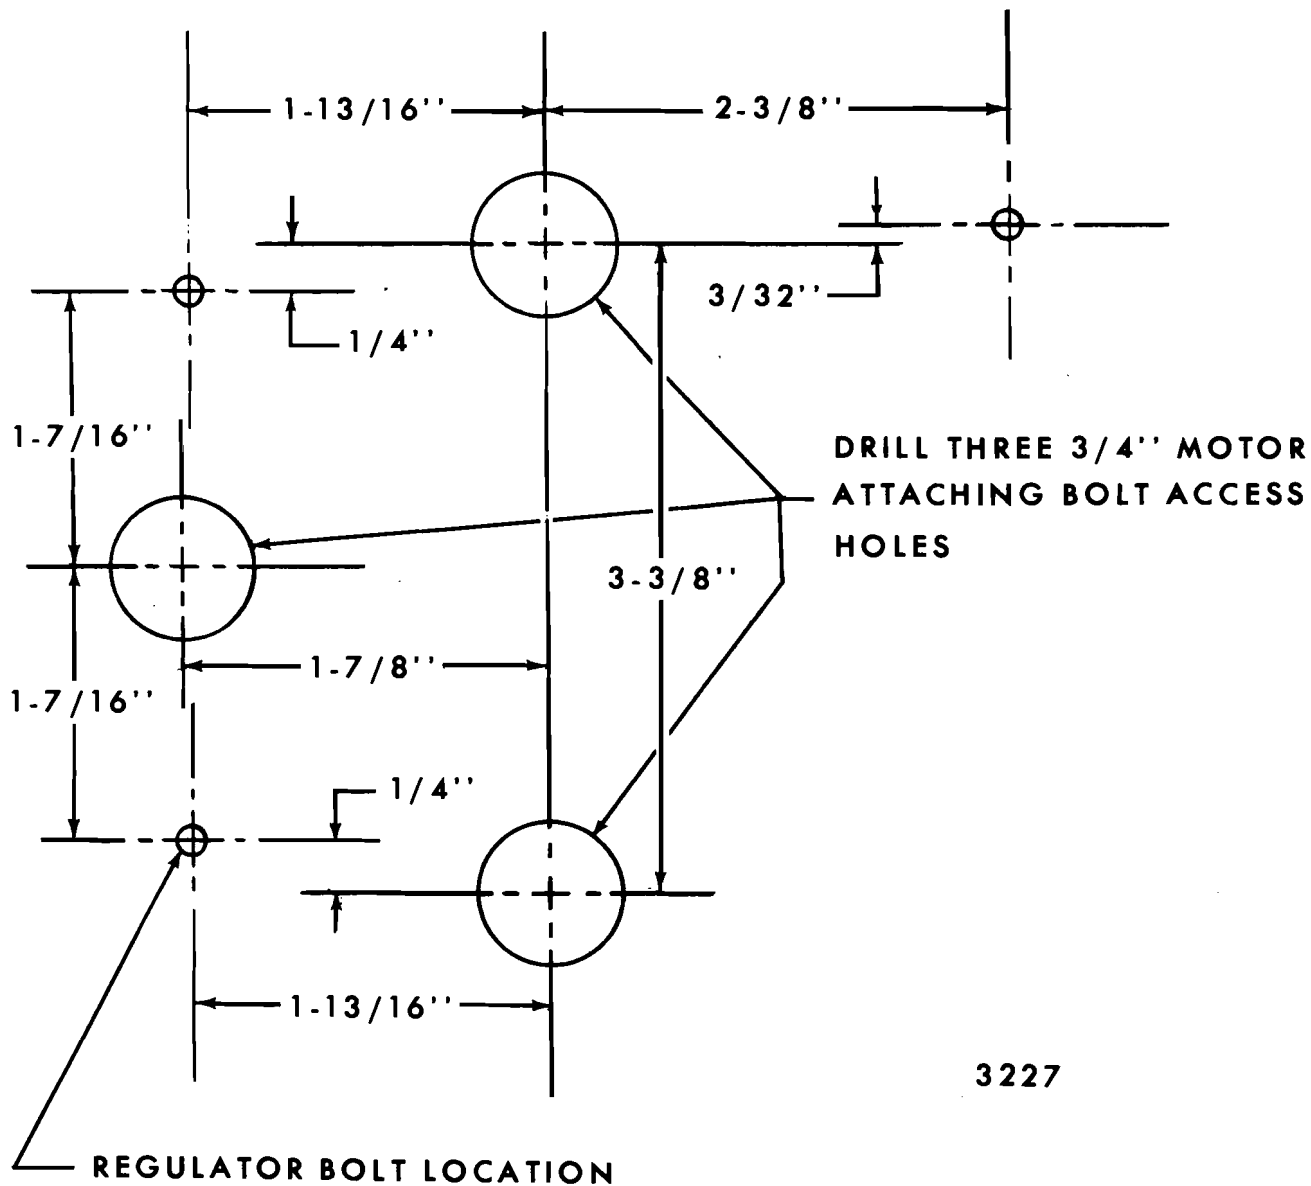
Window Regulator Upper and Lower Left Attaching Bolt Reference Points for Locating Window Motor to Regulator Attaching Bolts - "A-35, 39, 45, 55, 69" Style Front Doors
